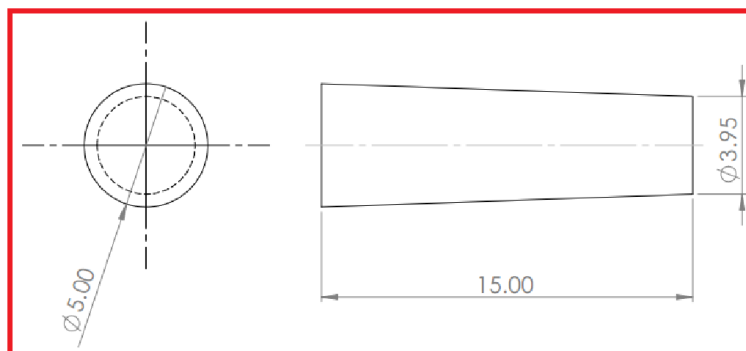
Tire Carrier Geometry and Dimensions (mm)
